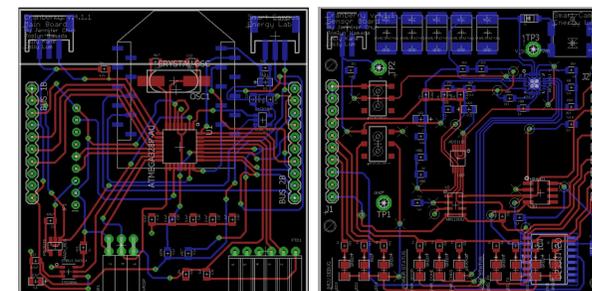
Cranberry v4.1 PCB (2.375" by 2.375")
